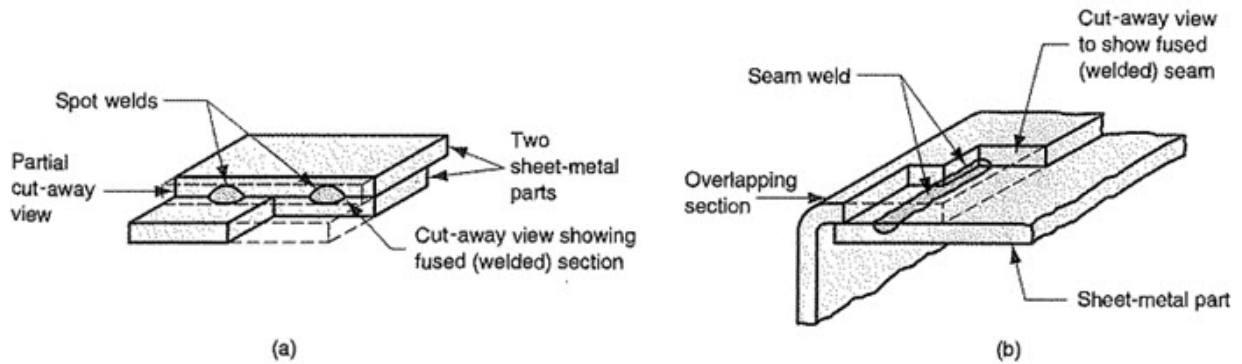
(a) Spot weld, and (b) seam weld.
